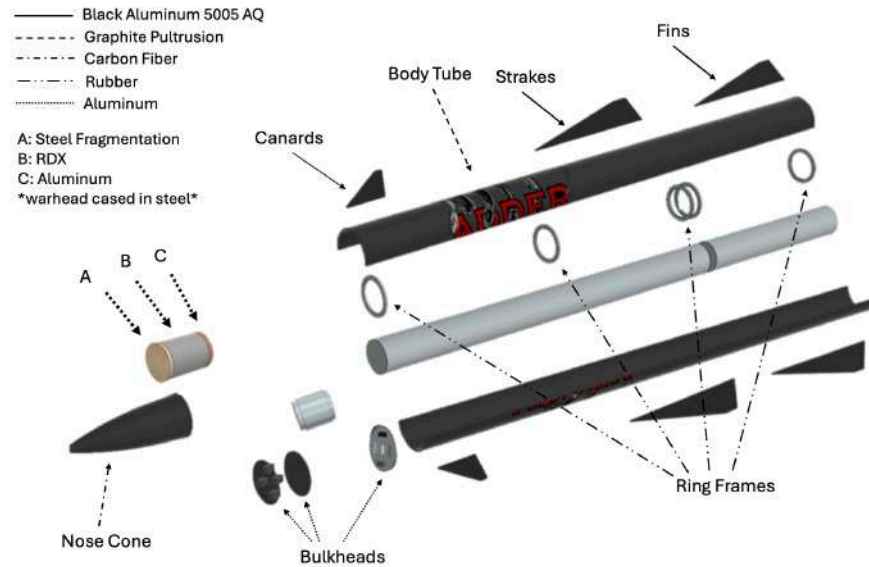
Materials Breakout for Black Aluminum Version
